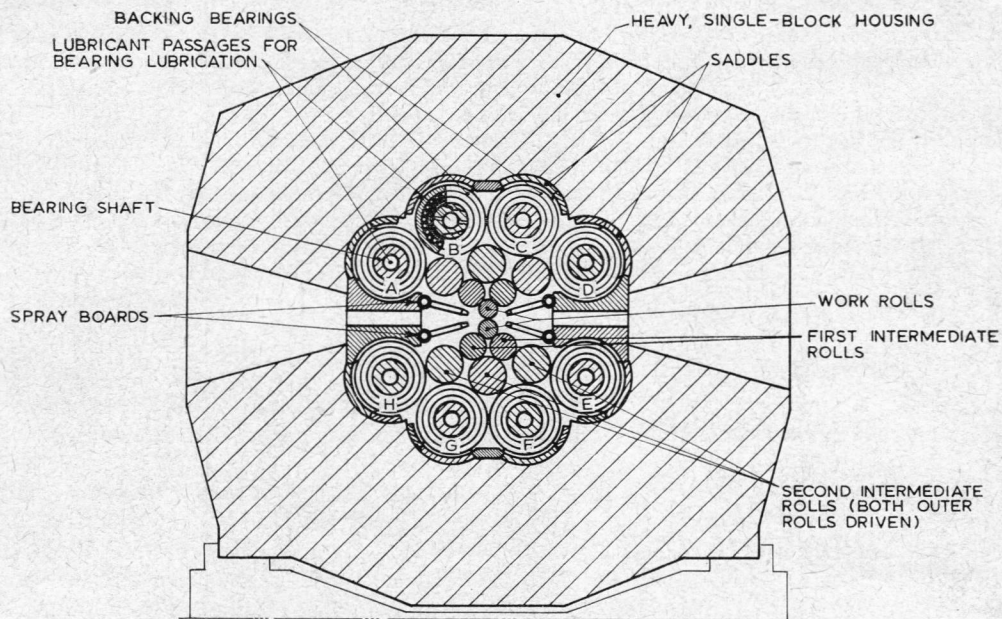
Roll arrangement and lubrication of a Sendzimir 1-2-3-4 cold mill
